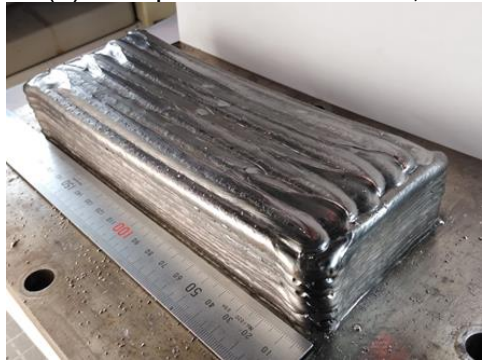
shows the completed WAAM block, manufactured using the skin and core deposition technique.
